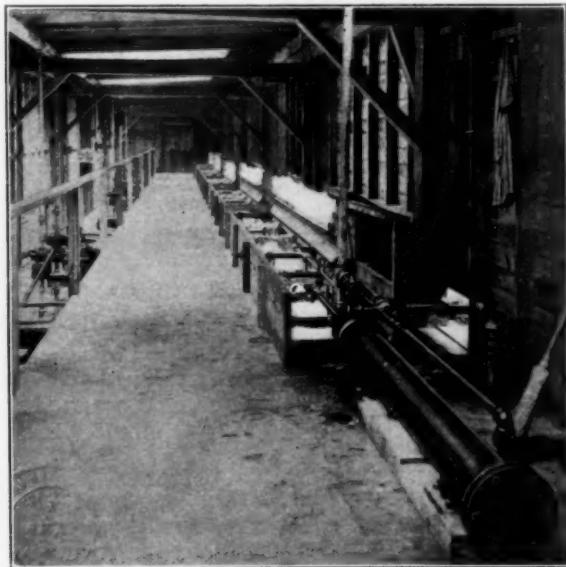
CONVEYOR DRIVEN BY HYDRAULIC CYLINDER
